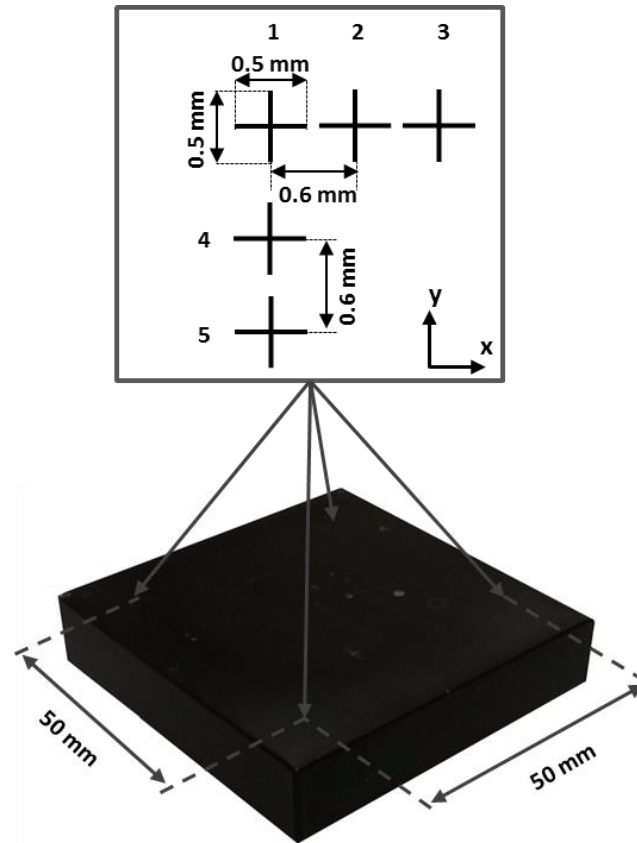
The test plate used to validate positioning ARR of the proposed modular workpiece holding device
